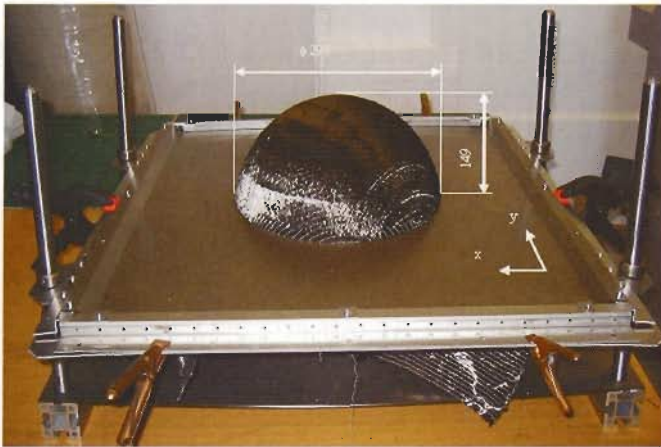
Draping test rig and fold-free draping by geometrically adjusted separation, maximum diameter: 298 mm, draping height: 149 mm
